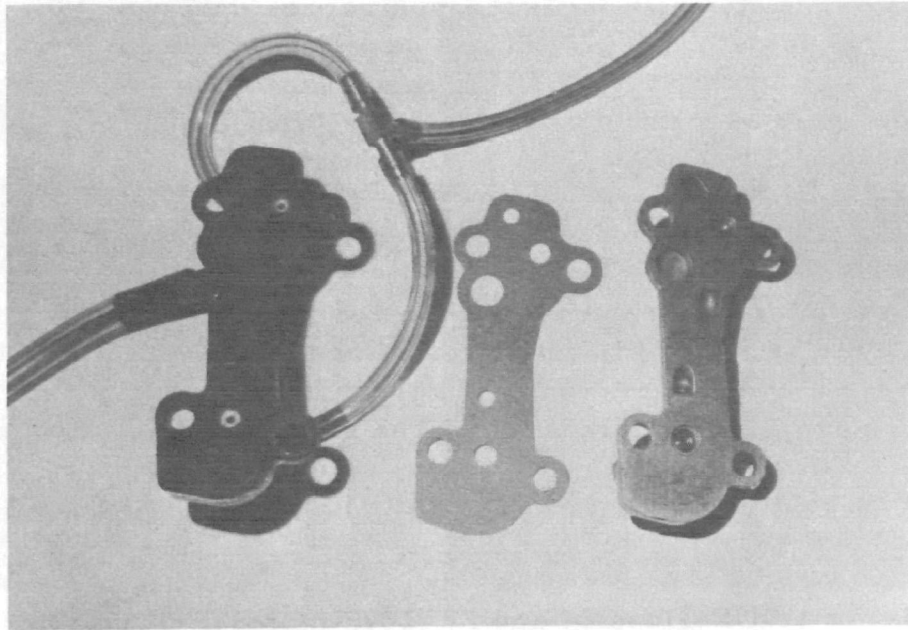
Modified and stock crankcase bleed valve plates for a 1970 Chrysler 5 hp outboard
